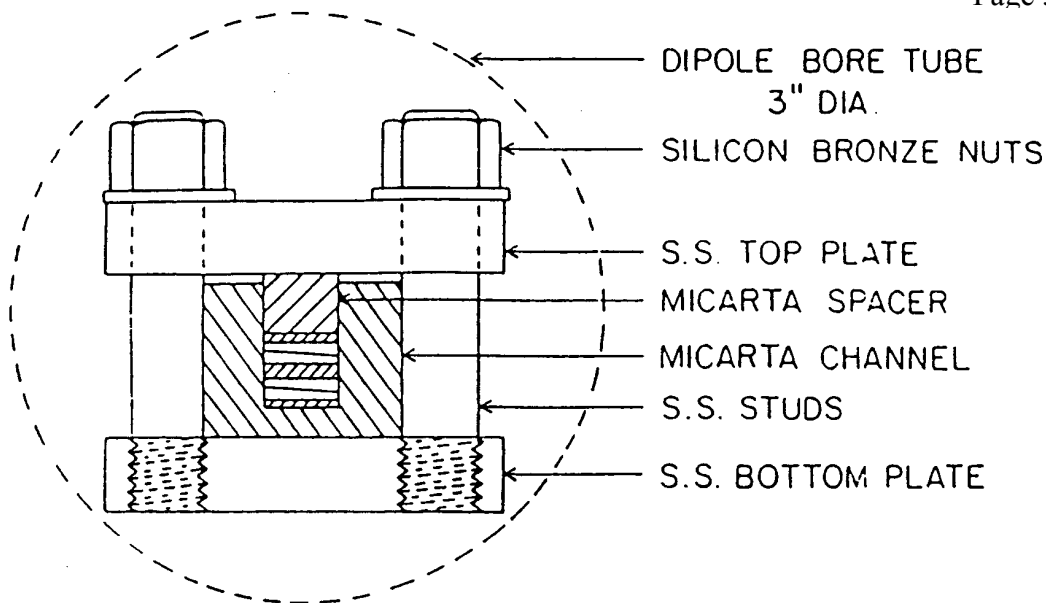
Mechanical Assembly. Two bifilar pairs of keystone samples are assembled, as shown. The members of each pair are separated by Kapton, 0.010 in. thick. Instrumentation is located in G-10 strips placed in contact with each sample. The thicknesses of the G-10 strips are 0.030, 0.100, and 0.030 in., respectively. The stainless steel studs are spaced 1.5 in. apart along the 48 in. length of the fixture. The silicon bronze nuts are tightened to 200 in.-lbs. torque resulting in a mean pressure on the samples of approximately 10 kpsi.
